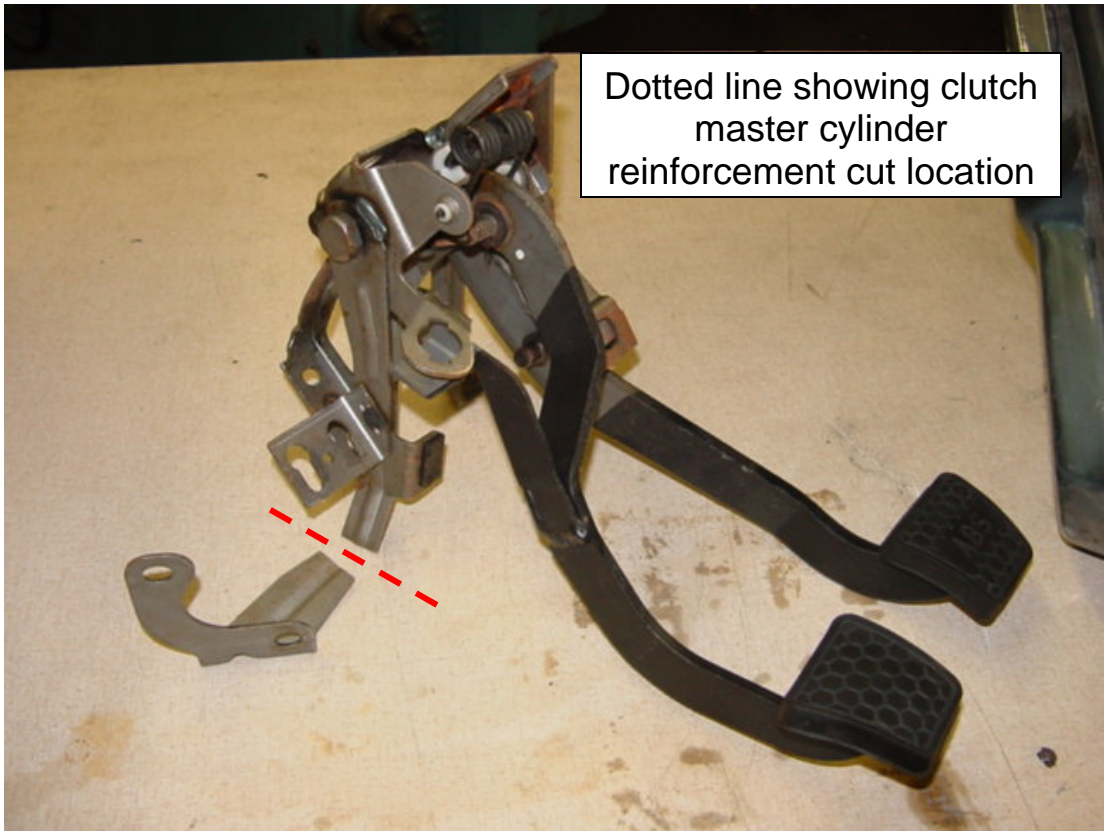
Clutch Master Cylinder Bracket Cut Location
